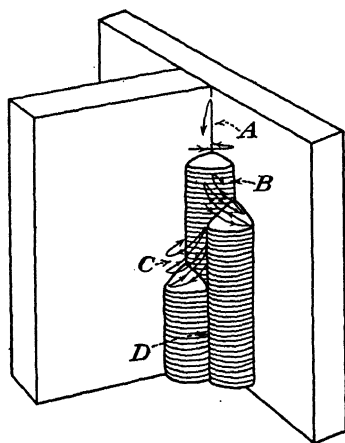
Vertical fillet weld. A. Inverted T motion. B. Travel of electrode in making a right-hand J motion. C. Travel of the electrode making left-hand J motion. D. The joint between the second and third bead is made in the center of the fillet weld.
